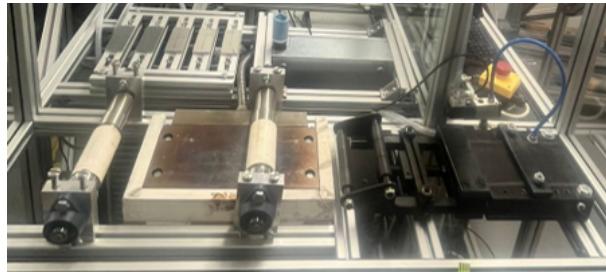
Pneumatic strip feeder and press roller sub-assembly
